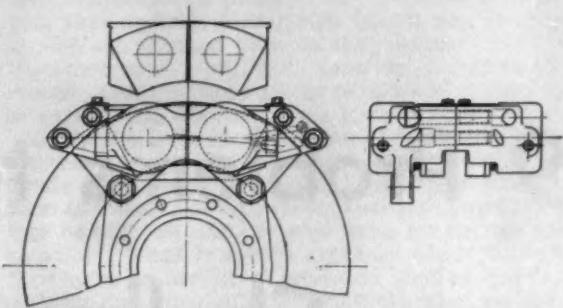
Split caliper for commercial vehicles has two pairs of bores on each side of the caliper. One pad assembly out of a caliper is shown to illustrate two segmental linings on one backing plate.
